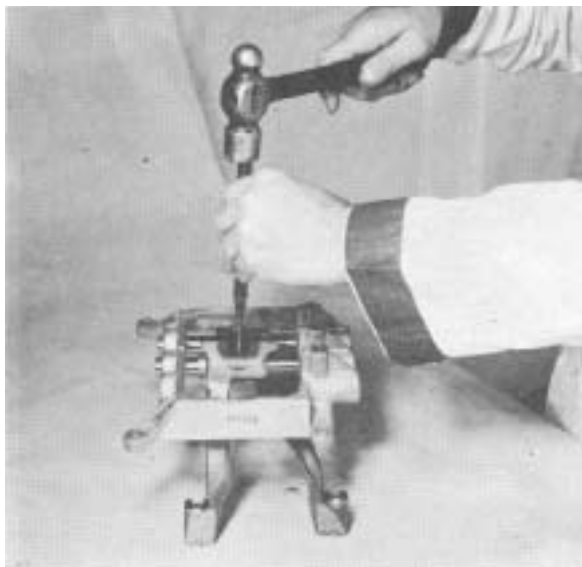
Using a small pin or drift, remove 2nd & 3rd shift fork roll pin.
